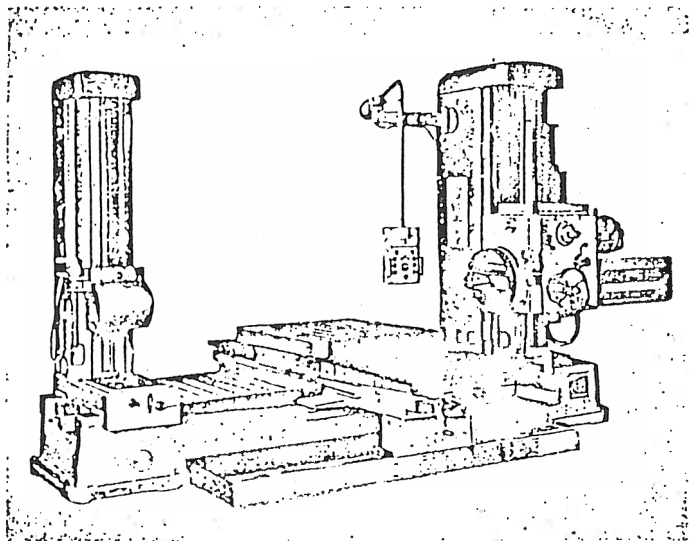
Protection of slideways by means of telescopic cover plates on a Plauert-Wetzel horizontal boring machine (Vereinigte Werkzeugmaschinenfabriken, Frankfurt a.M., Germany).
